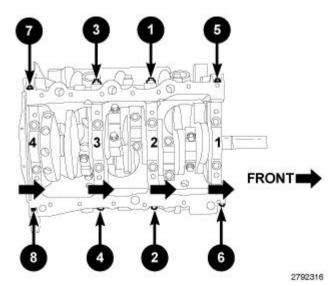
Main Bearing Tie Bolts Installation Sequence Courtesy of CHRYSLER GROUP, LLC
